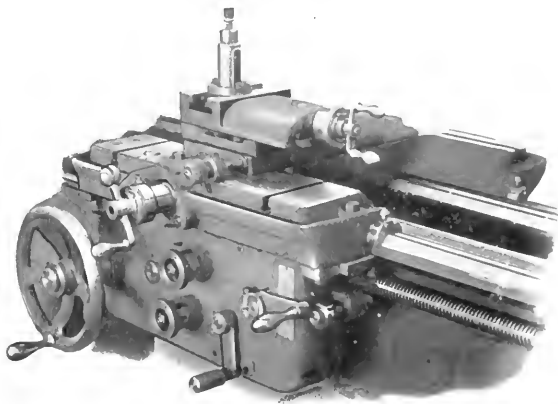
Detail View of Carriage showing Chasing Dial and Stop
